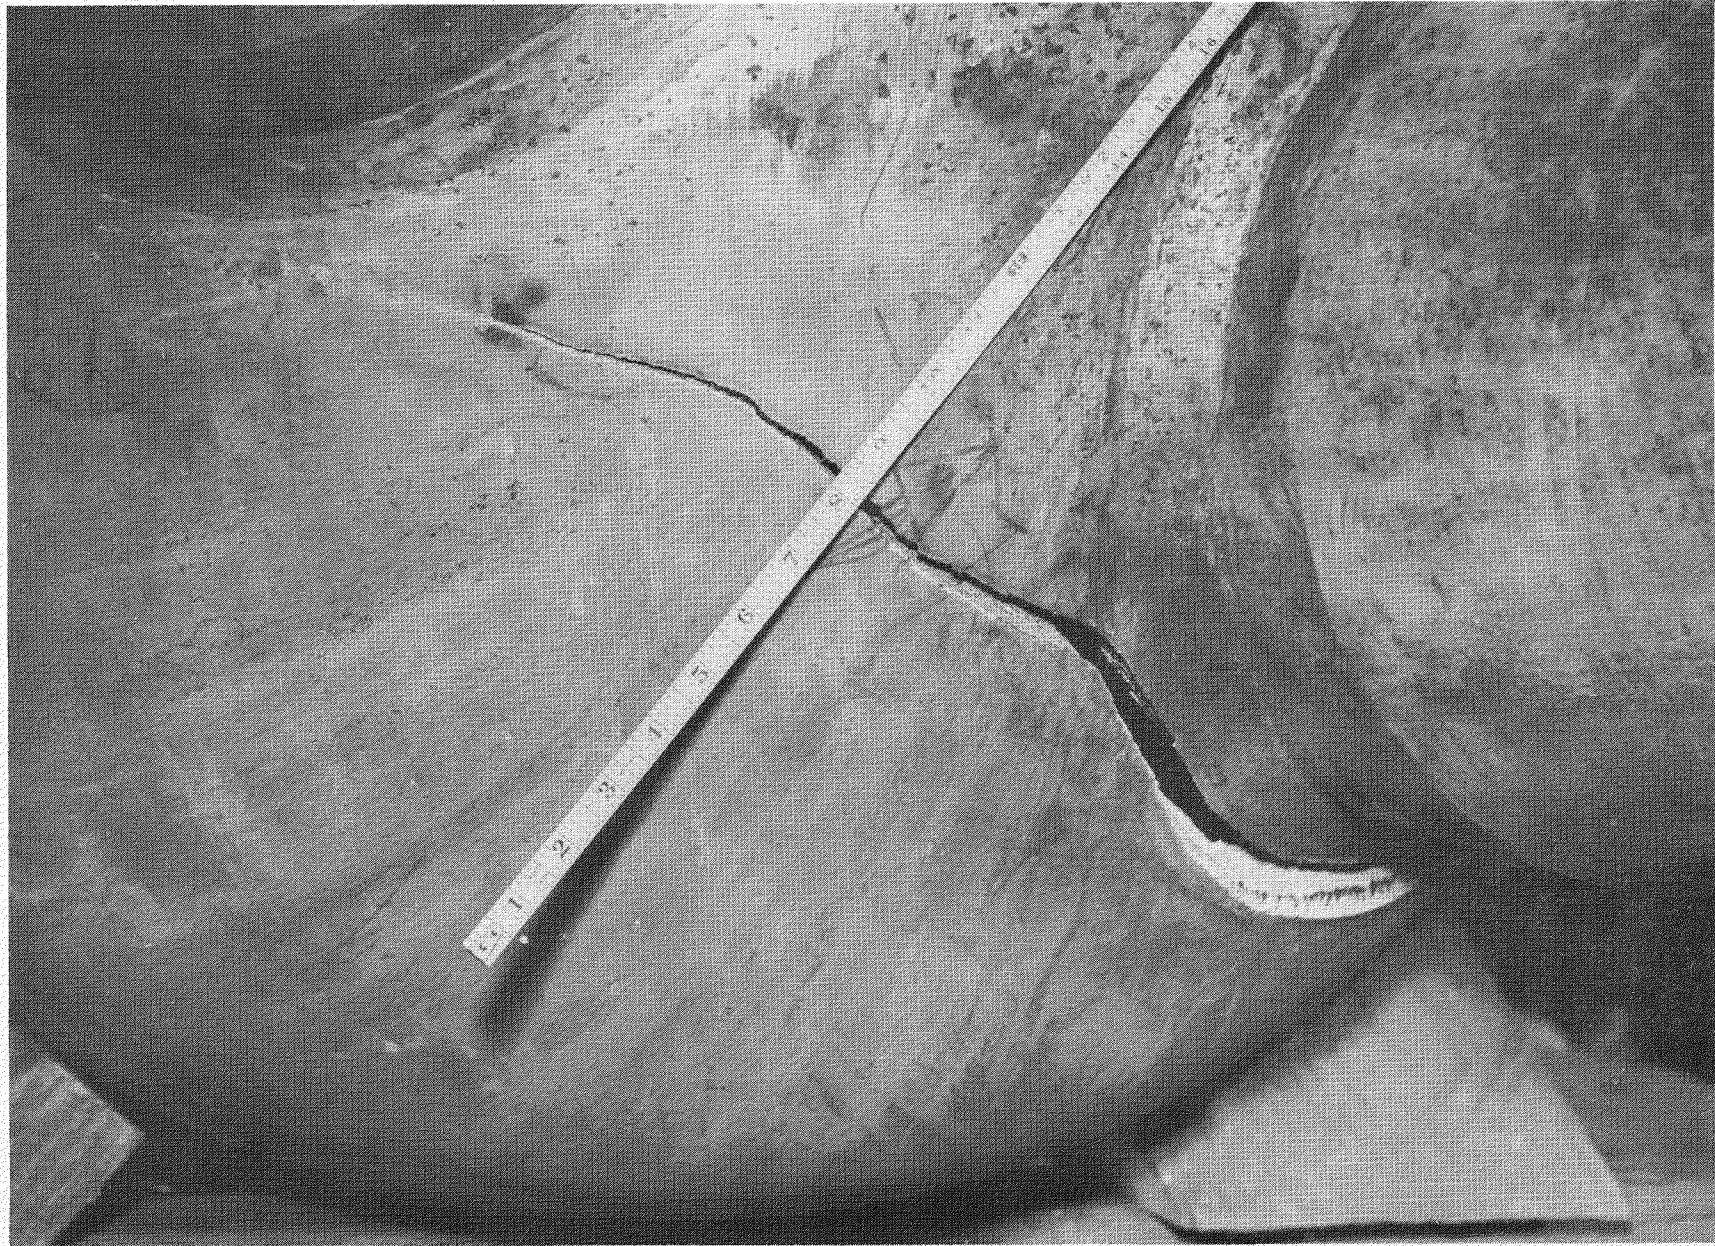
Path of Fracture Along Bottom Head in Vicinity of Nozzle No. 4
